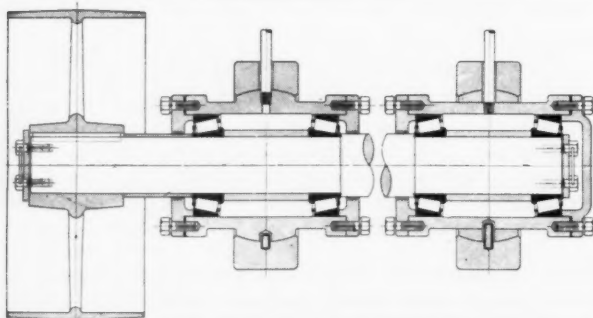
Mounting Developed for Rubber Hogs, Showing the Provision Made for Self-Alinement of the Shaft and for Shaft Rigidity.
